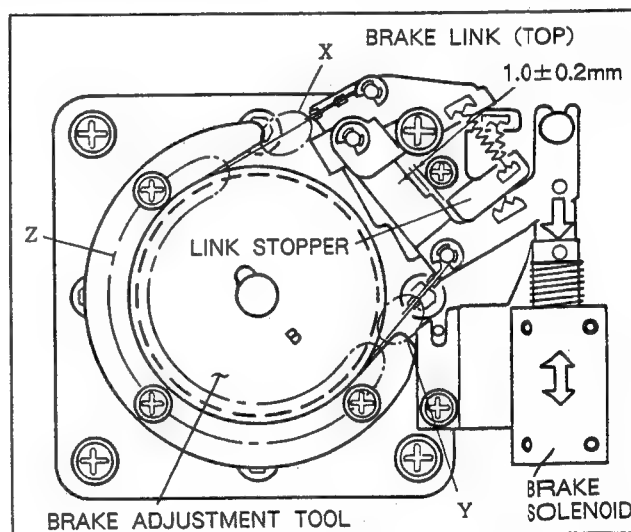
Link Stopper/Brake Solenoid Position Adjustment
